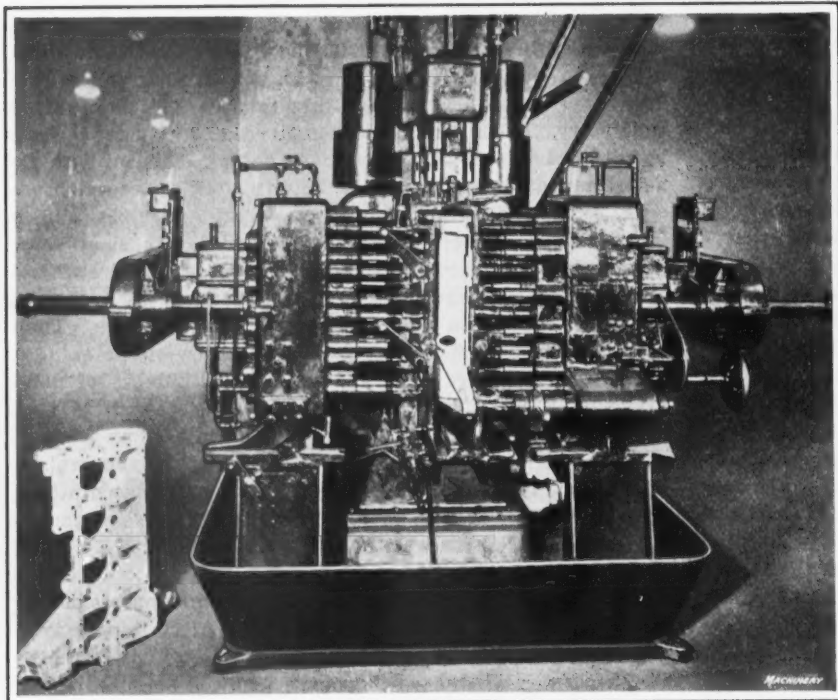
Foote-Burt Three-way Multiple-spindle Drilling Machine for drilling Eighty-four Holes in Automobile Crankcase at One Setting
